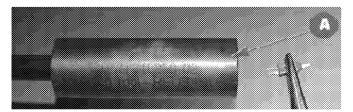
Using the insertion tool to attach the Snap-fit Blade
